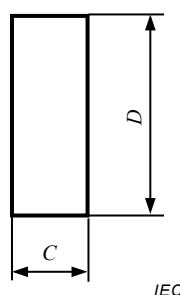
Fixture cut-out information for SC duplex adaptor
